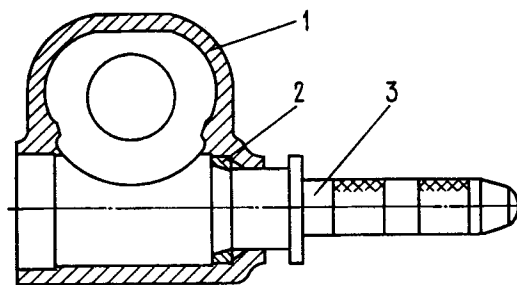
Removing Worm Upper Bearing Outer Race with Mandrel 67.7853.9541:
